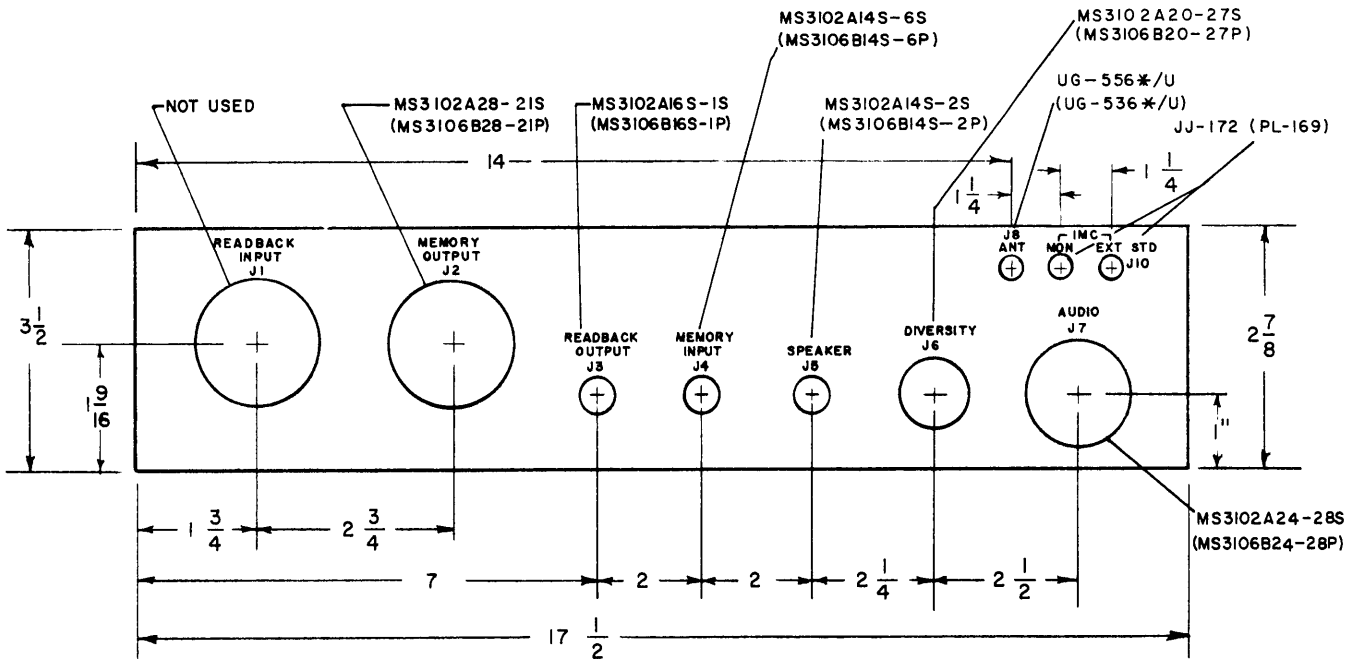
Outline and Installation Dimensions, AN/FRR-85(V)1 (Sheet 1 of 2)
